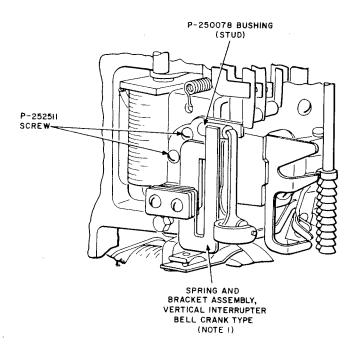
Bell Crank Vertical Interrupter Spring and Bracket Assembly and Associated Parts
